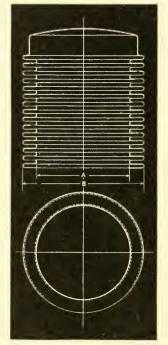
SECTIONAL VIEW OF ELECTRICAL REFRIGERATOR CONTROL.
